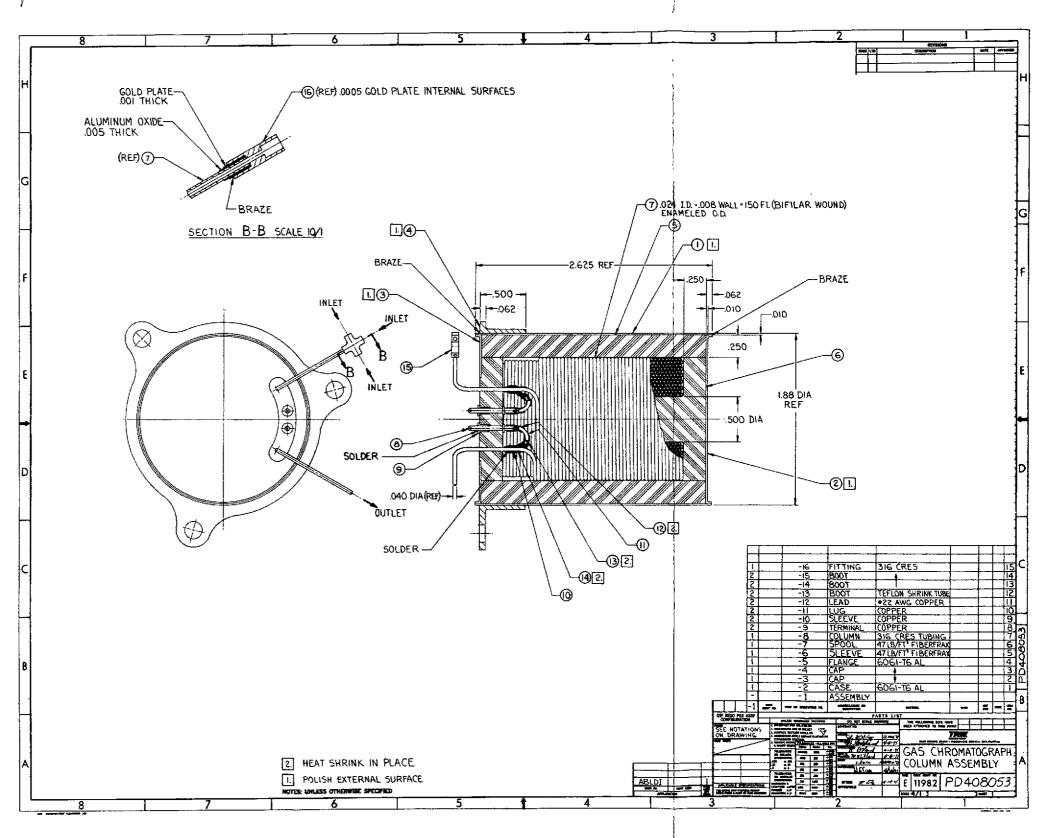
Gas Chromatographic Column Assembly 4-53 Drawing
